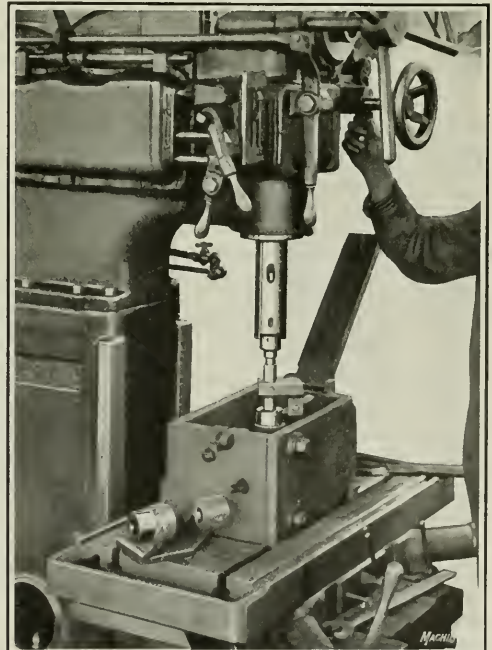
Turning Hub of Cast-iron Bracket with Box-tool
